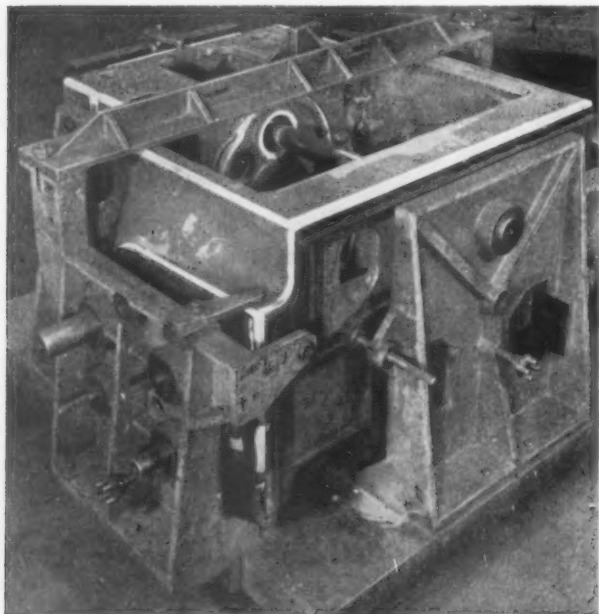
TRANSMISSION CASTING OF FIG. 7 PLACED WITHIN A CHECKING FIXTURE. NOTE LOCATING POINTS AND GUIDE BARS.
